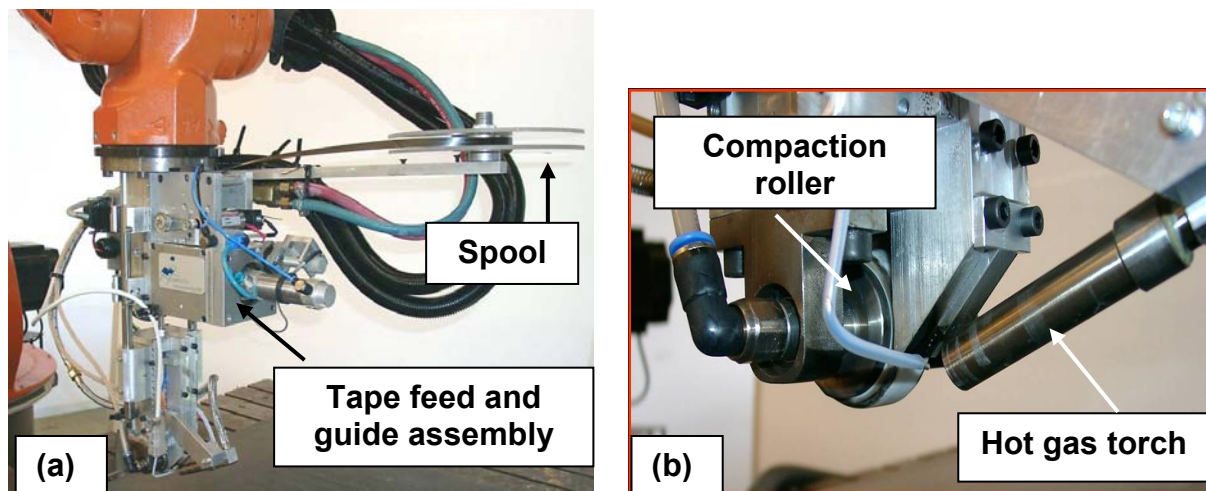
(a) Tape placement head EVOI (b) Detail of compaction roller and hot gas torch.
